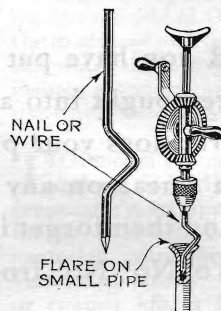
A bent finishing nail, used in a hand drill, makes useful tool for flaring a pipe end.
